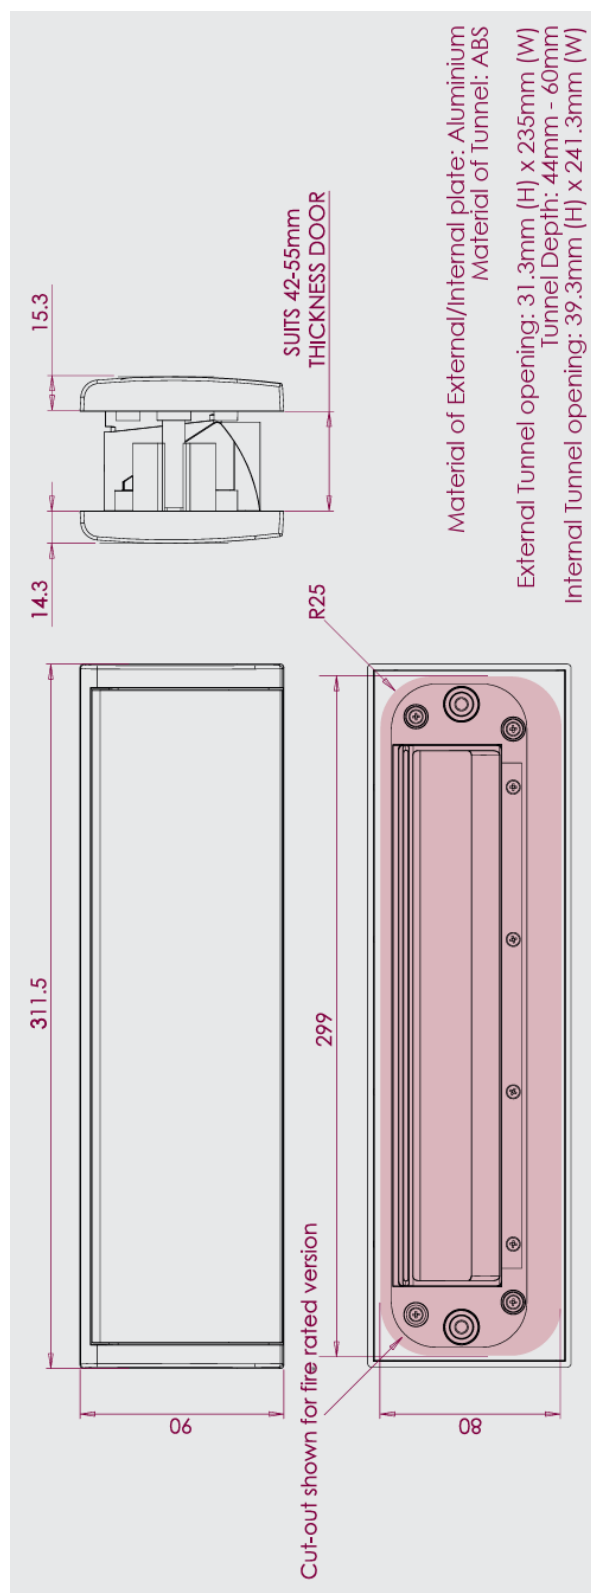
Item 27 – Rutland RLP.SNPSNP Letter Plate Drawing
